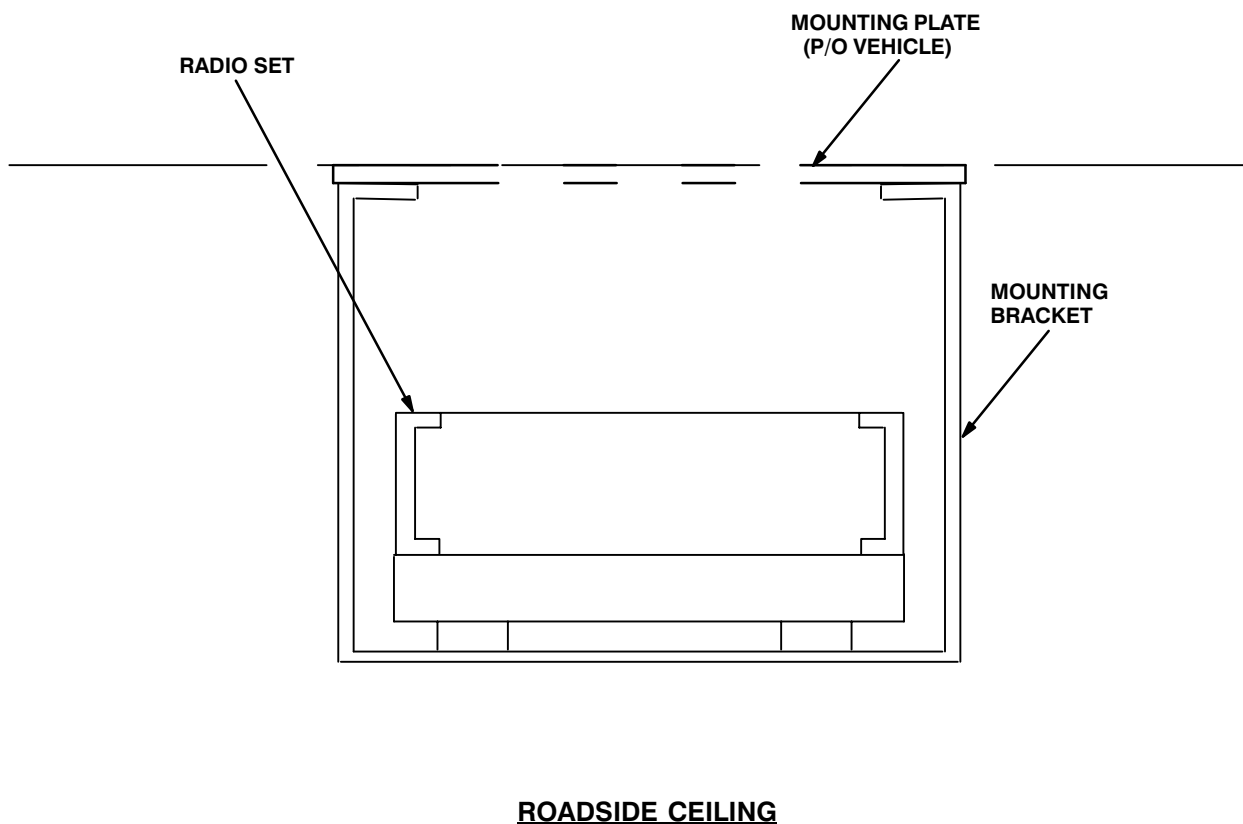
(2). MK and Radio Installation: Radio Equipment Locations
